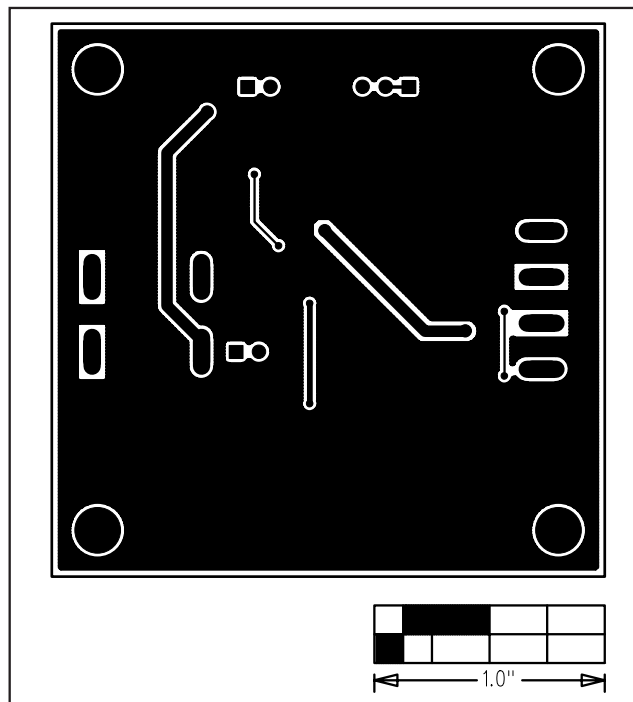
MAX17062 EV Kit PCB Layout—Solder Side
